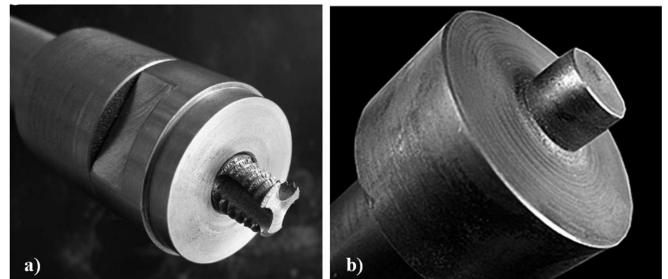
Tool applied for lap joint welding; a) Triflute-type of a tool consisting of a housing, cylindrical threaded probe with three grooves and a smooth shoulder, b) tool consisting of a housing, smooth cylindrical probe without a thread and a smooth shoulder
